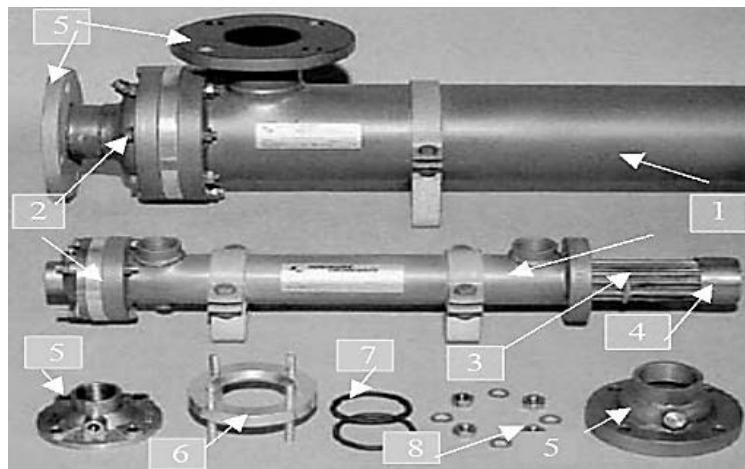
The device of a disassembled shell-and-tube heat exchanger: 1 – casing, 2 – covers, 3 – heat exchange tubes, 4 – tube sheet, 5 – flanges, 6 – connecting ring with studs, 7 – gasket, 8 – fasteners
